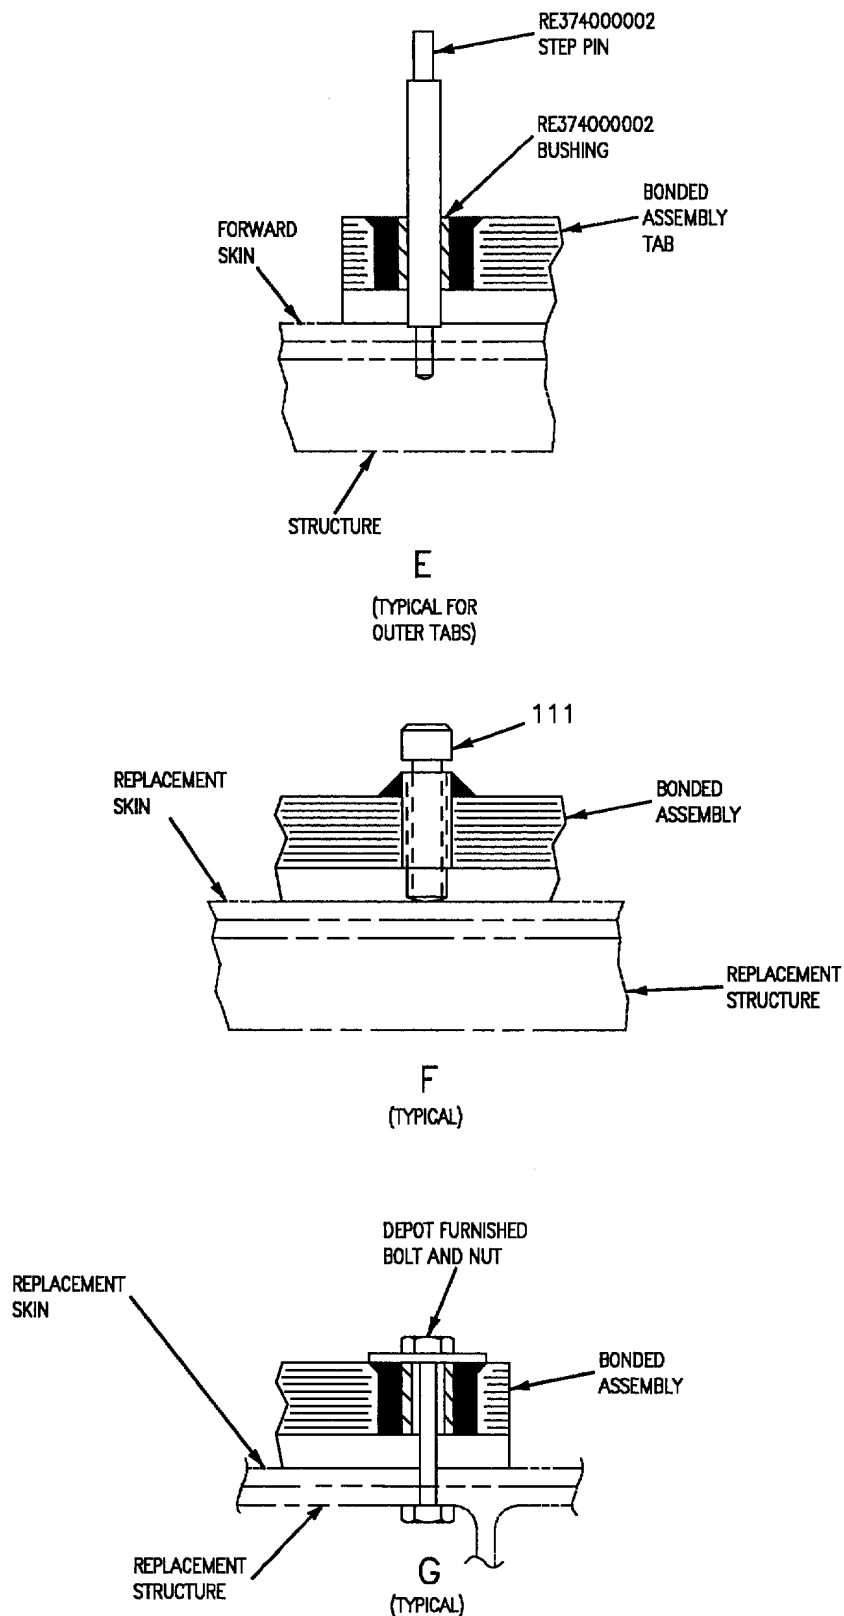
Installation of Plate Set for Drilling 74A180756 Skins and Substructure (Sheet 4)
